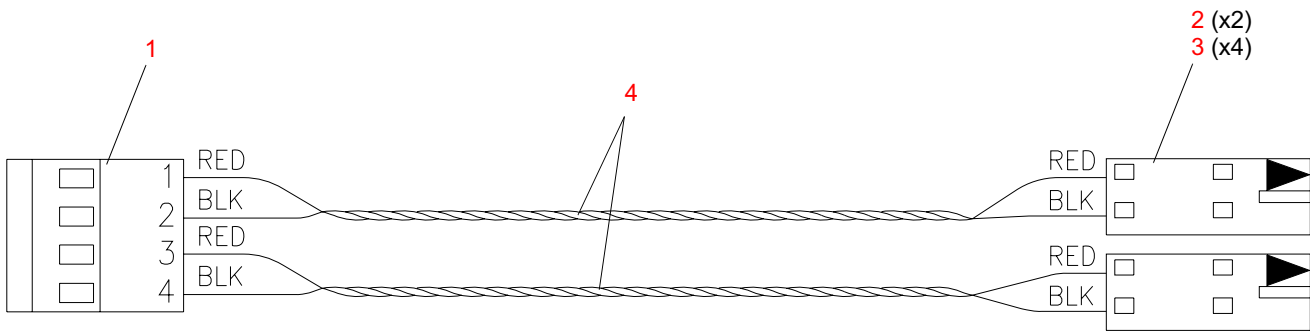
Relay to Gobo Fan Interlock Cable Assembly
